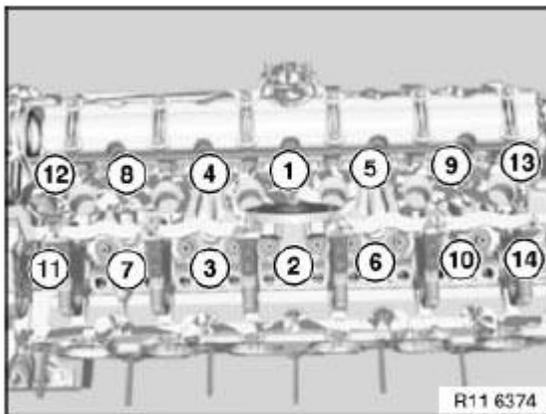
Insert Cylinder Head Bolts Using Special Tool
